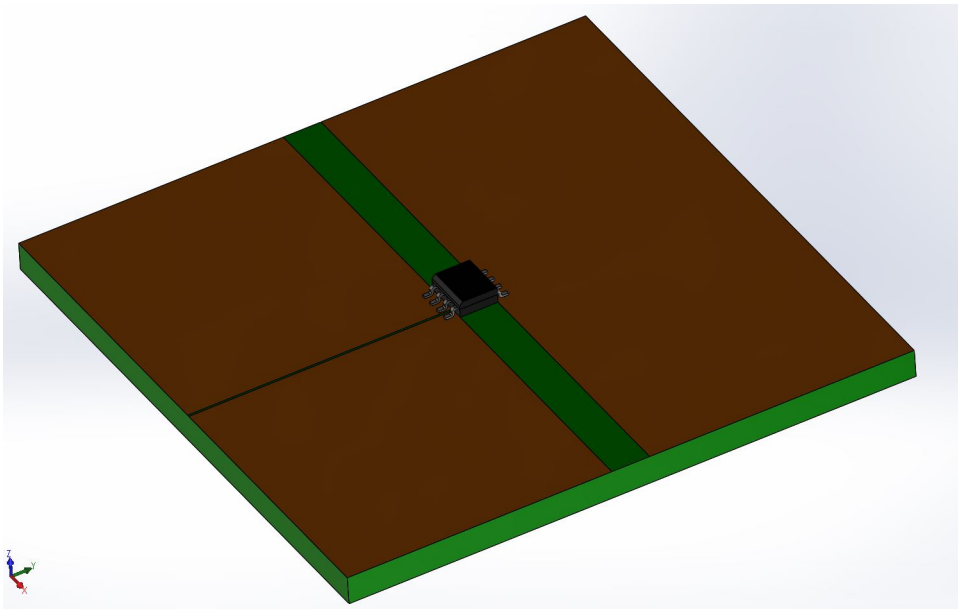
MOSFET in SO-8 bond-less package mounted on a FR-4 PCB.
